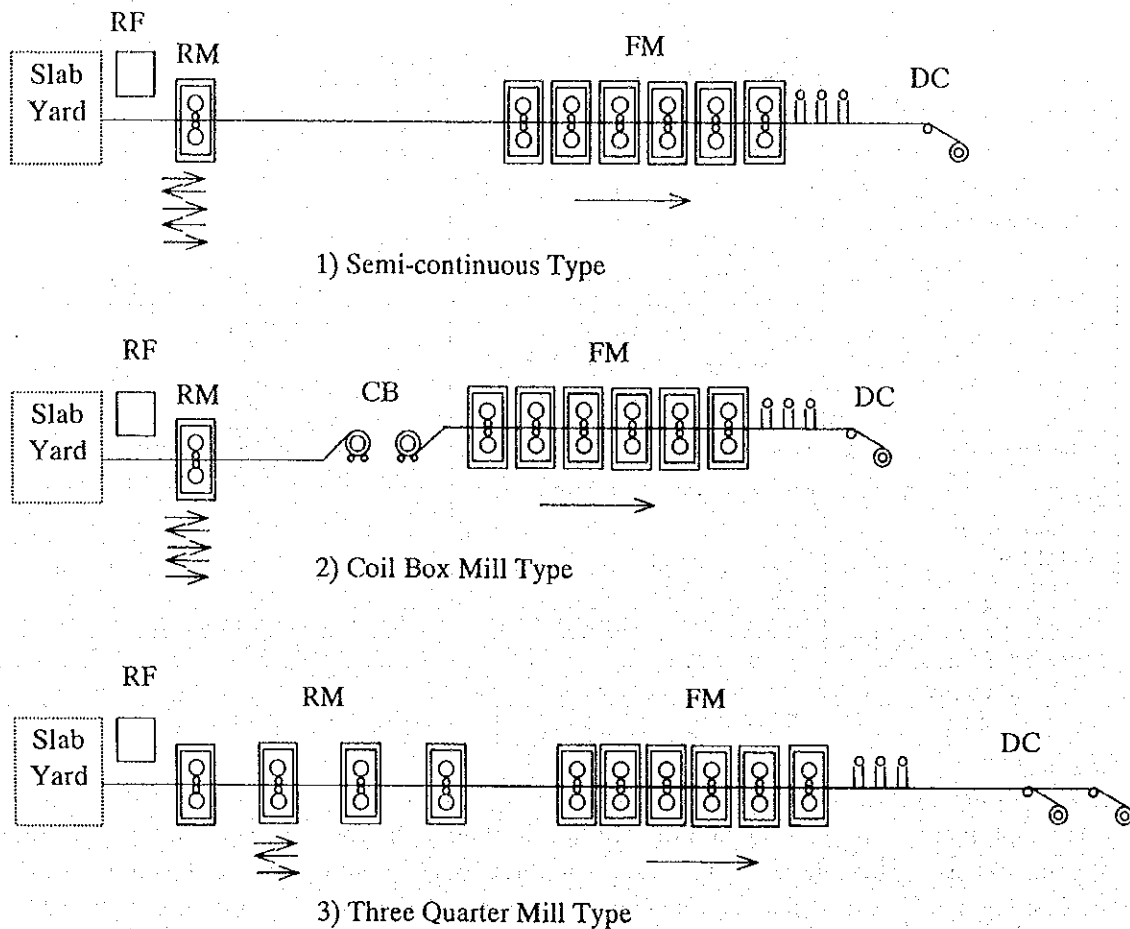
Schematic Drawing of Roughing Mill
